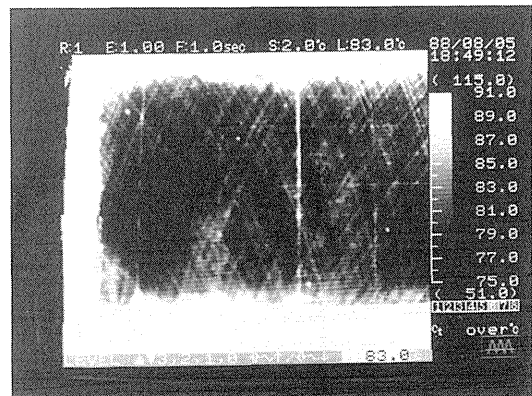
Thermo-view of V-shaped cracks on the carbon steel surface by milling treatment ($T_w=238.9^\circ\text{C}$)
